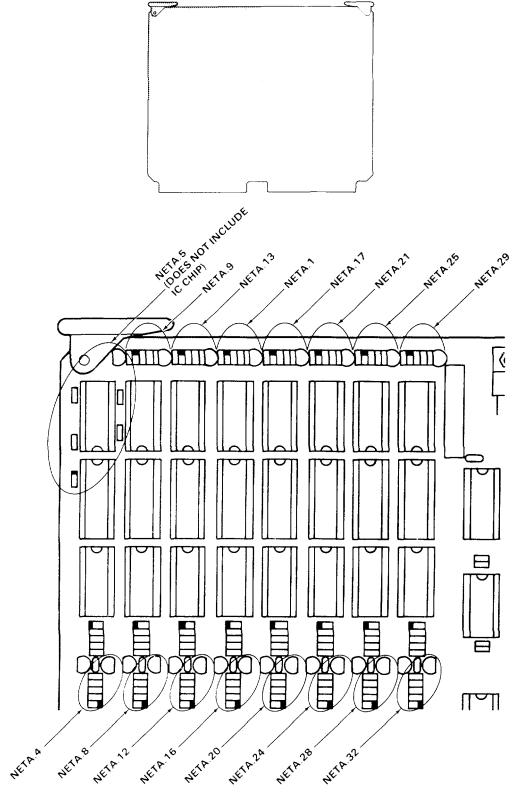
Driver/Sensor Component Layout (Sheet 1 of 4)
